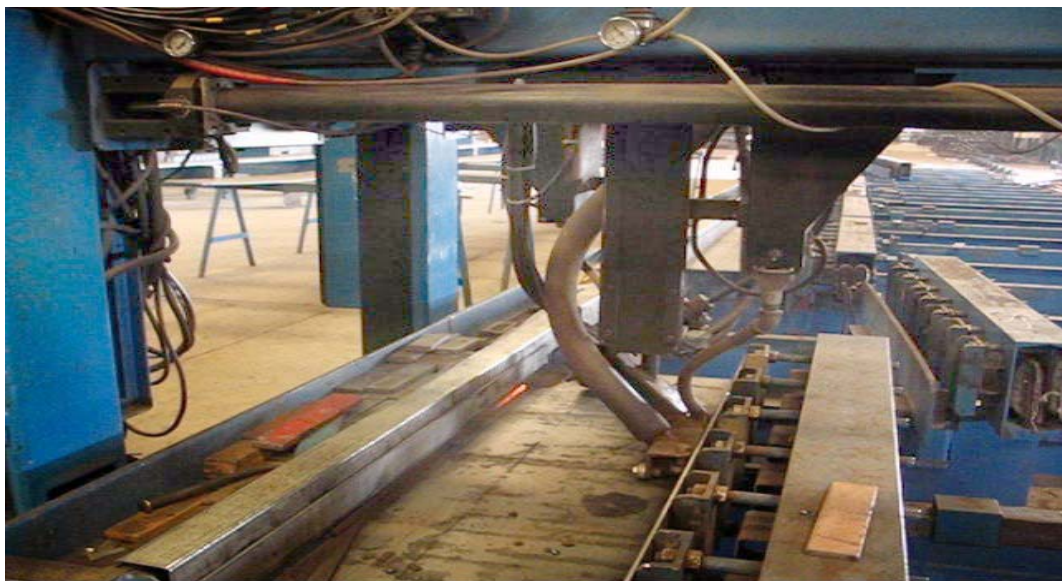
Automatic Submerged Arc Welding process
